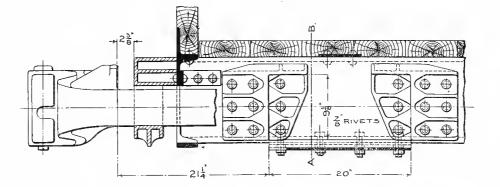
Butler Special Tandem Spring Draft Gear, Applied to Norfolk & Western Steel Underframe Cars. Butler Drawbar Attachment Co.
